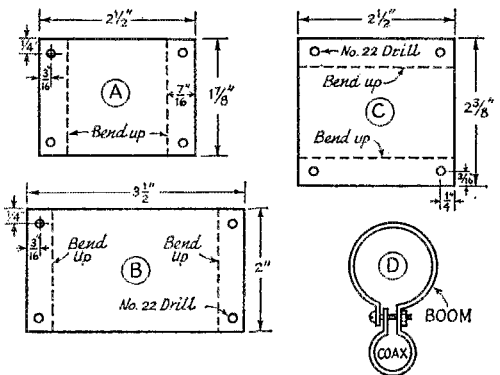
Dimensions of aluminum plates used to make the assembly clamps in the v.h.f. arrays. Sheet metal should be $\frac{3}{64}$ inch or thicker. Two A-type clamps are needed for joining $\frac{3}{4}$ -inch tubes at right angles. One B and one C are needed to mount a $\frac{1}{2}$ -inch element on a $\frac{1}{4}$ -inch boom. The "figure 8" clamp, D, made from a $\frac{1}{2}$ -inch wide strip approximately 6 inches long, is used to ground the coax to the boom, and keep it in a fixed position with respect to the driven element.
